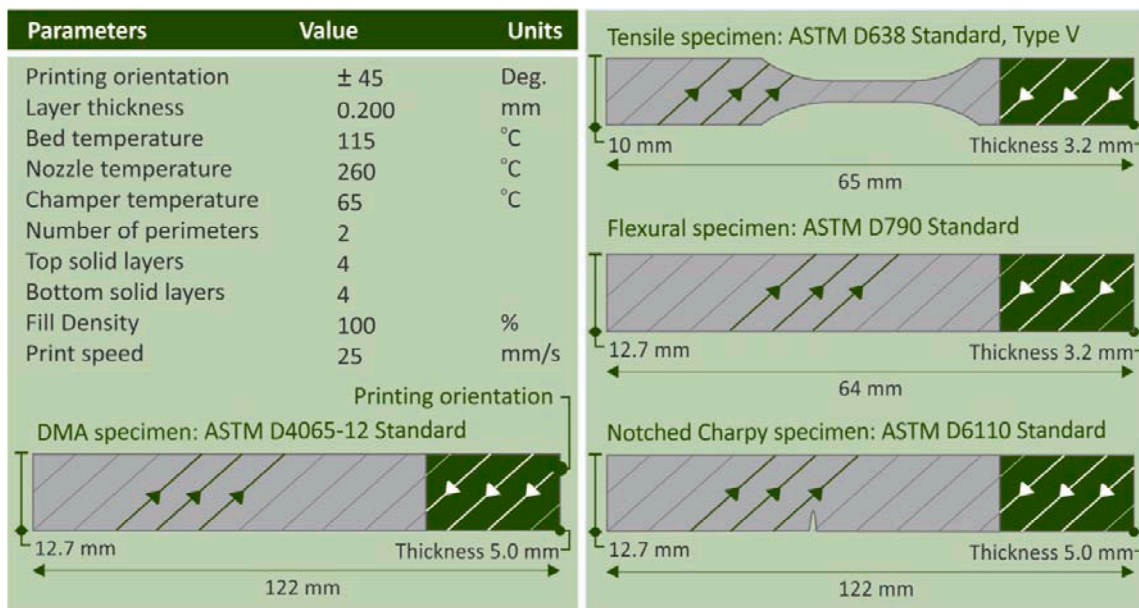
Settings for the fabrication of the specimens of this work with 3D printing. On the right side of the figure, the manufactured specimens' dimensions are presented.
